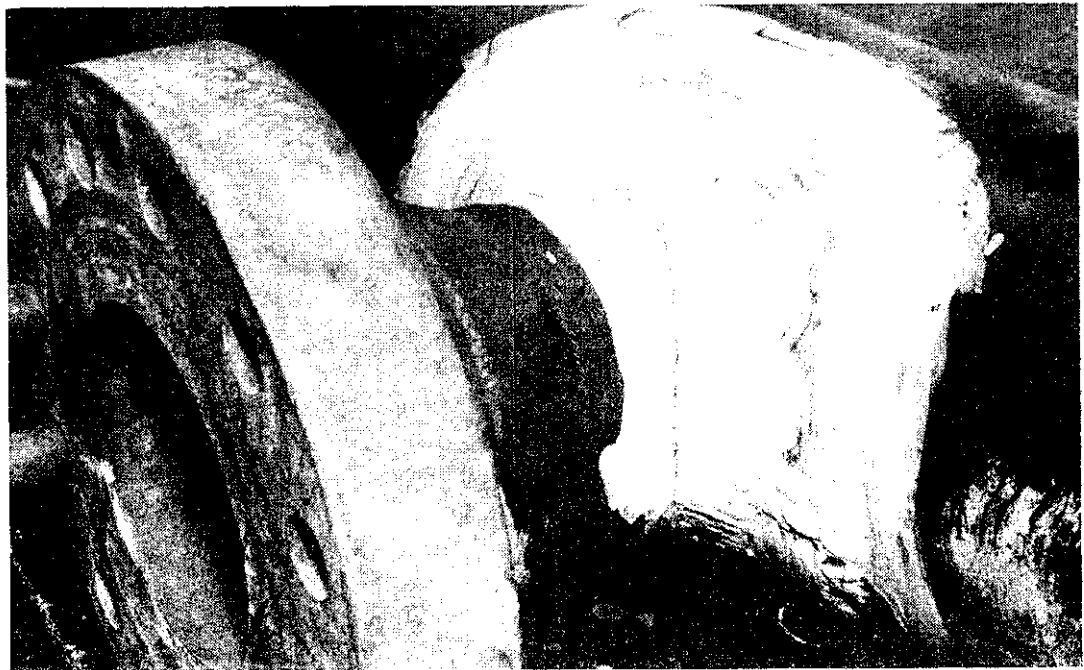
CLOSE-UP OF BRANCH PIPE SHOWING CRACK AT THE TOE OF THE REINFORCING STRAP FILLET WELD
